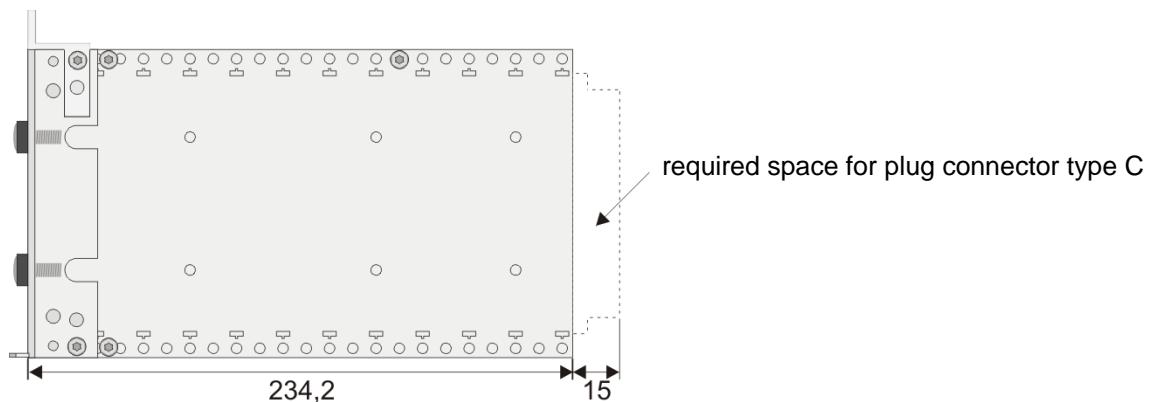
Side view of the board rack BGT07 with label bar, measurements in mm
